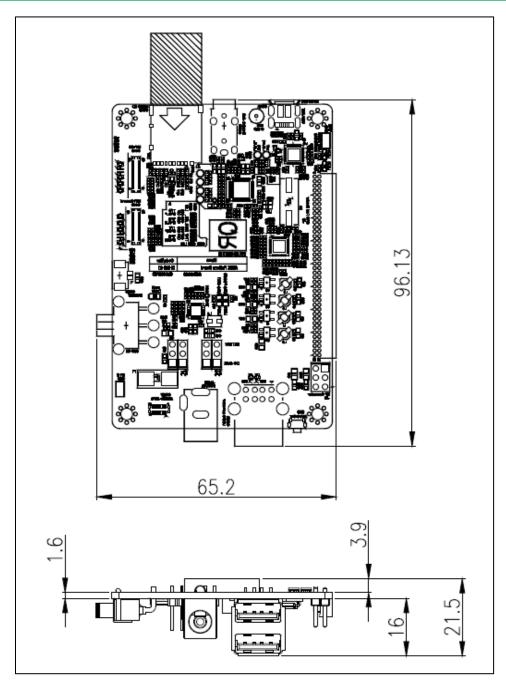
Mechanical Drawing ARTIK 530 Development Board Platform Board all dimensions are in [mm]
